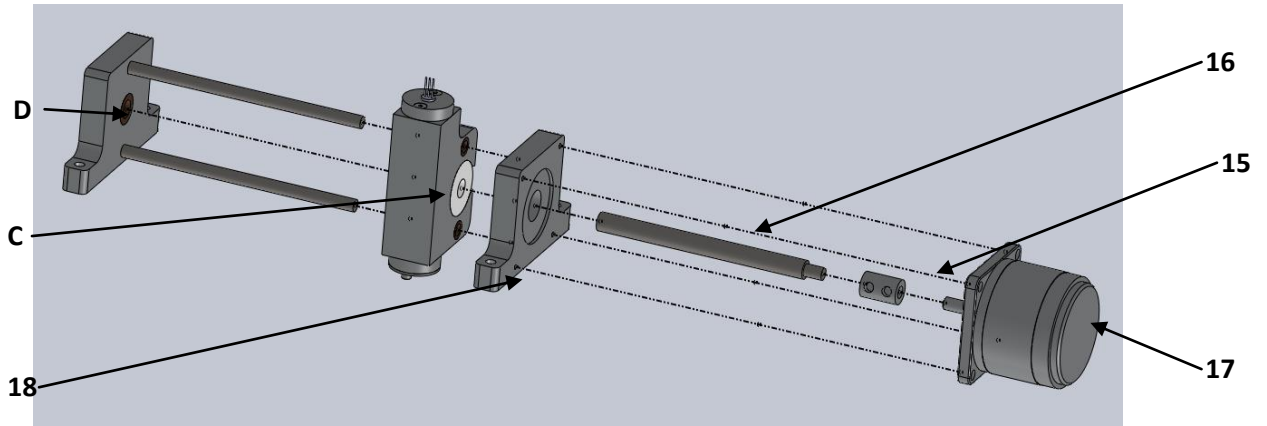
Linear Bearing Support, Motor Mount, and Motor (E) – (C, D, 15, 16, 17, 18)
